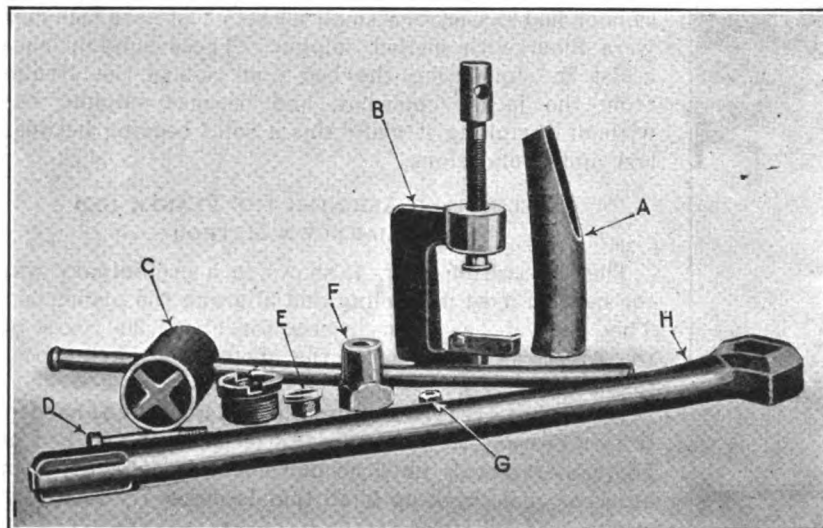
A FEW HANDY SERVICE TOOLS. FIG. 2. WHEEL PULLER IN POSITION
